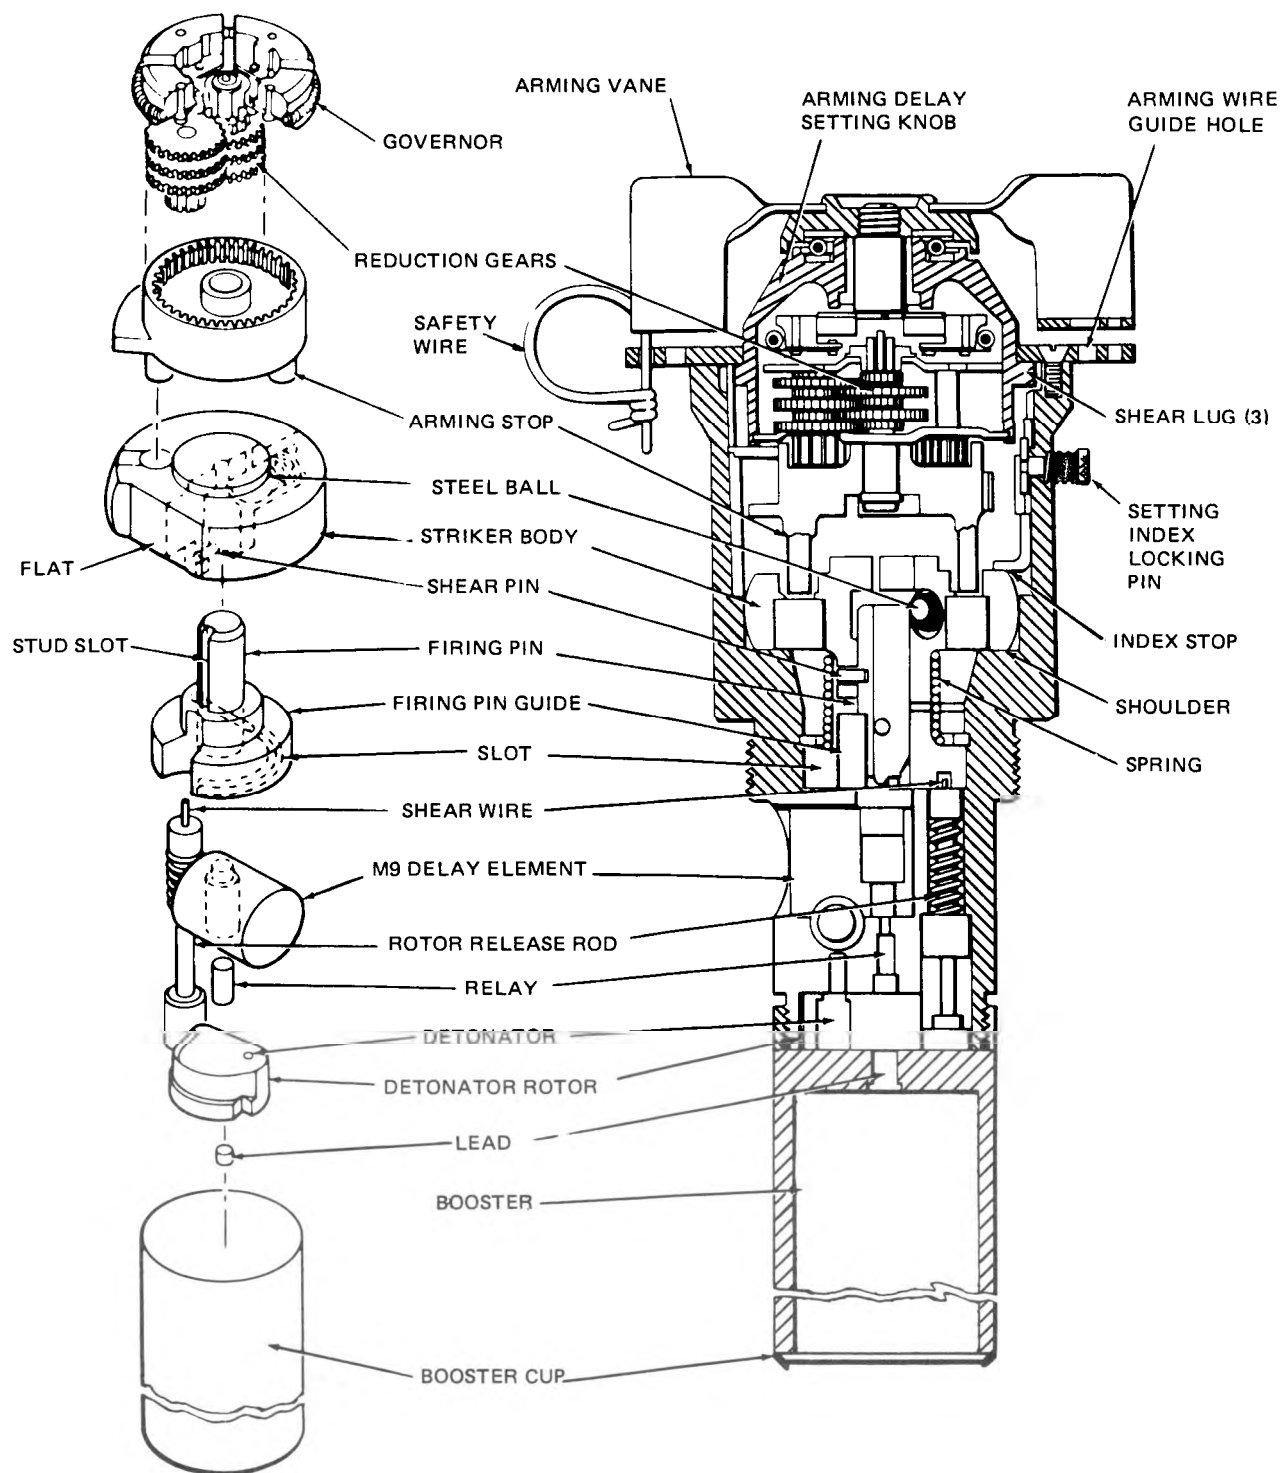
Mechanical Nose Fuze M904 Series — Exploded and Cutaway Views
